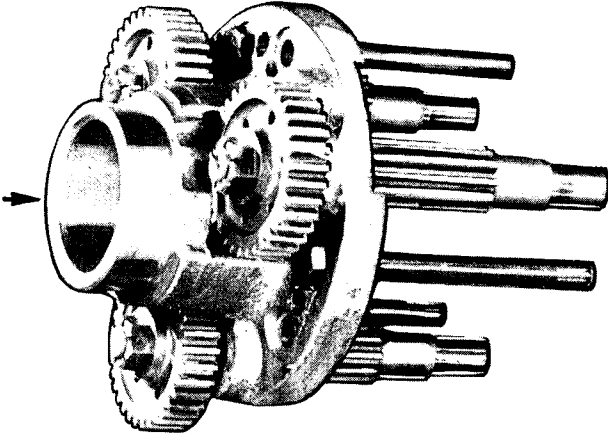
DIFFERENTIAL BEARING FIXTURE
